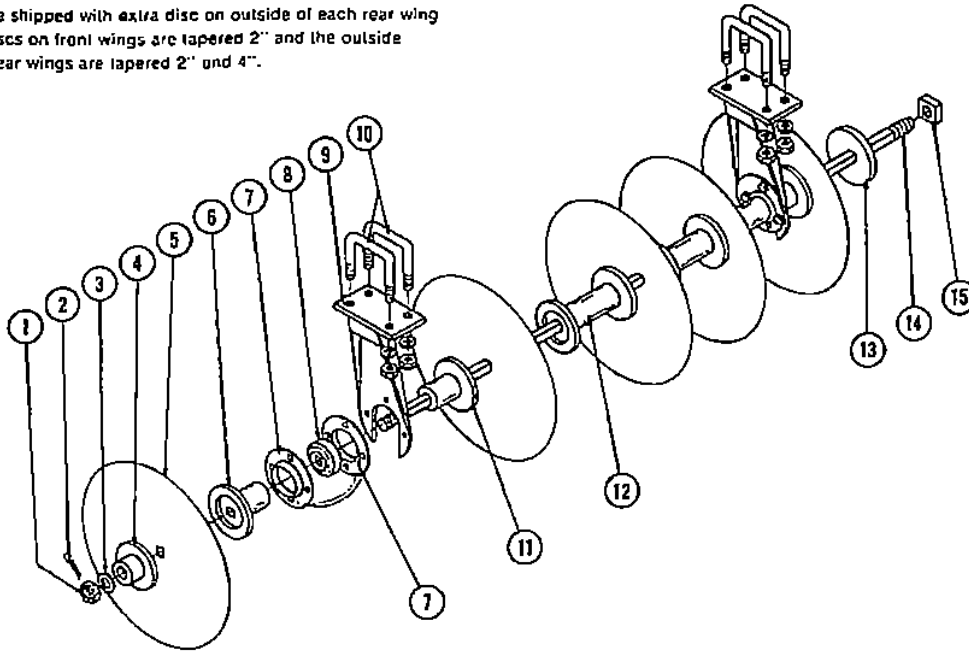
FLANGE BEARING CONNECTOR DISC GANG ASSEMBLY
